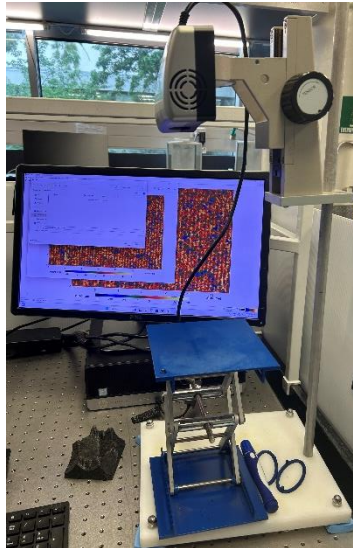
Fringe projection equipment, manufactured by LMI Technologies GmbH.
